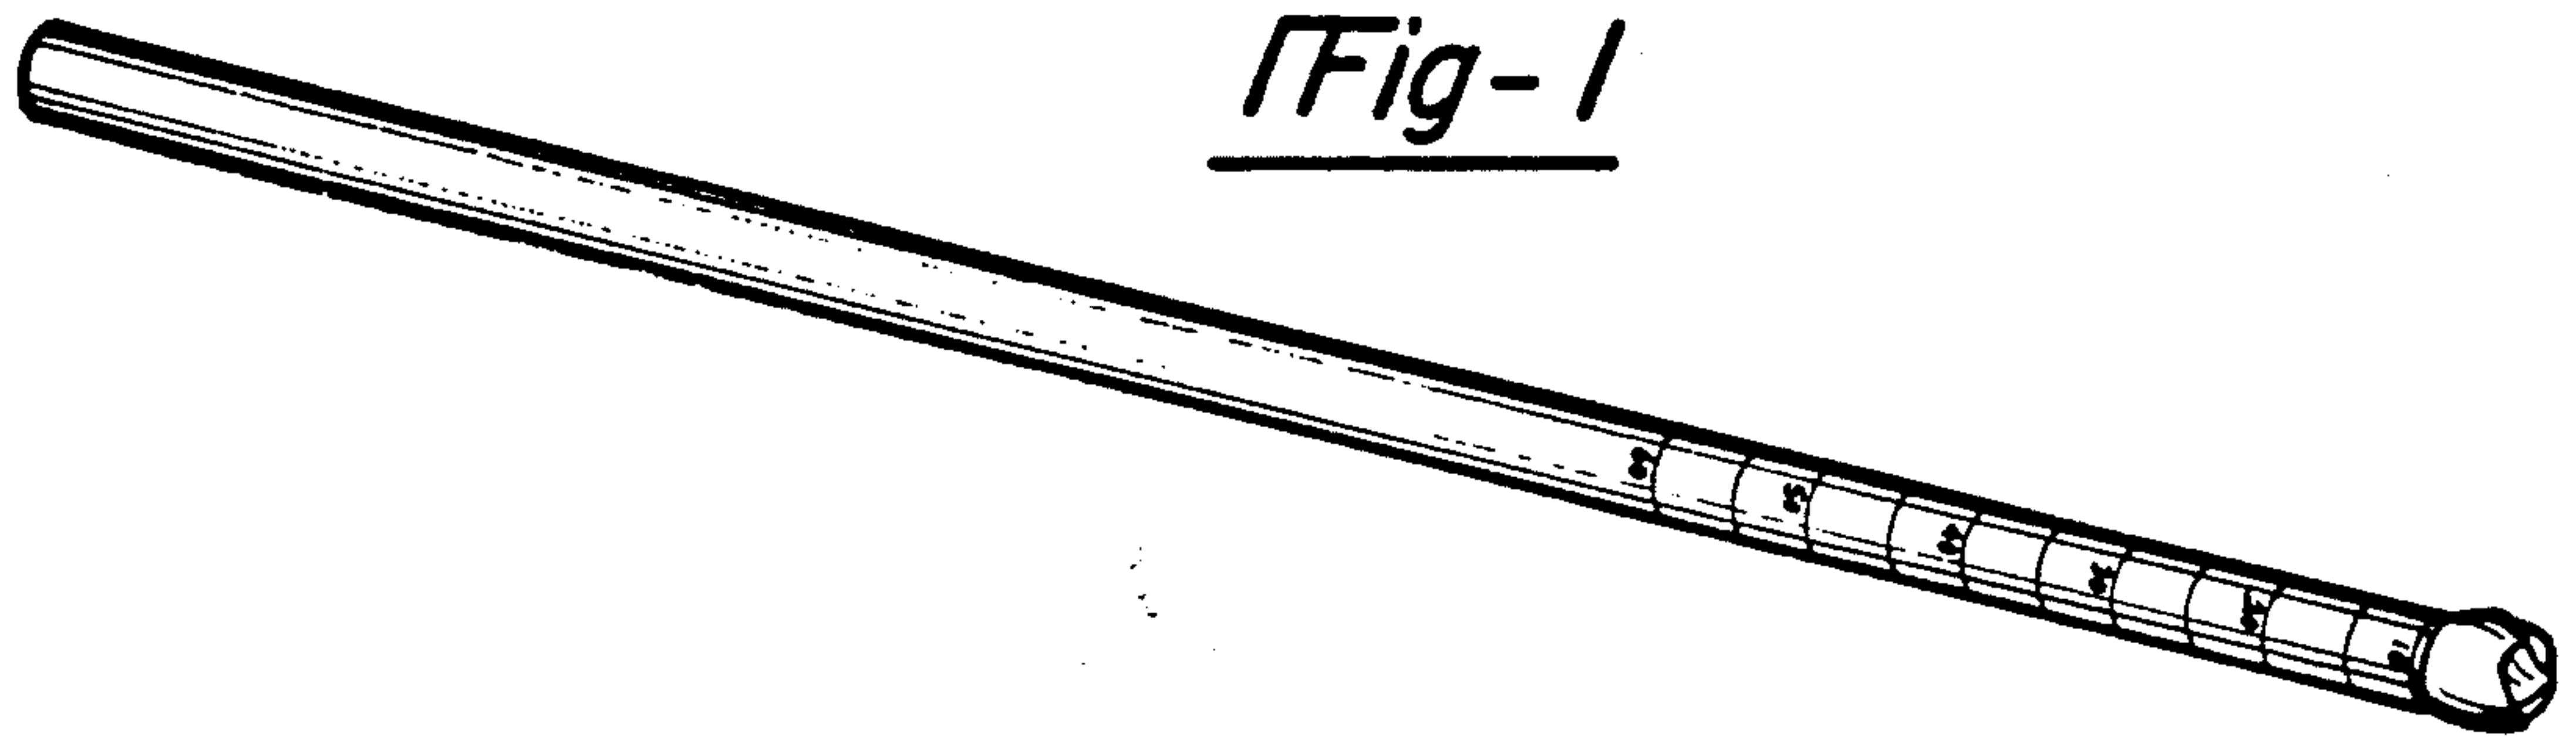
is a perspective view of a cannulated drill showing our new design;
